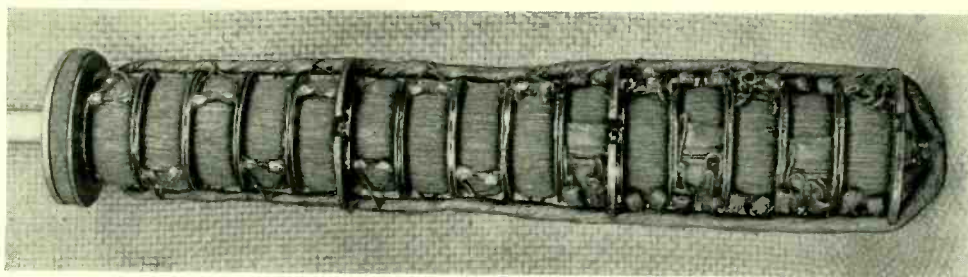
Coil assembly for 15-coil exchange-area cable as arranged for the lead sheath design
